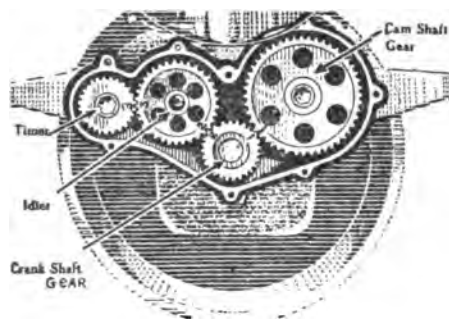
Note meshing of crank shaft gear mark (1) between the two teeth on cam shaft gear mark (1). This is the Overland model 85. Note the cam shaft turns in opposite direction to crank shaft when the crank shaft gear drives the cam shaft gear without using an idler gear.
